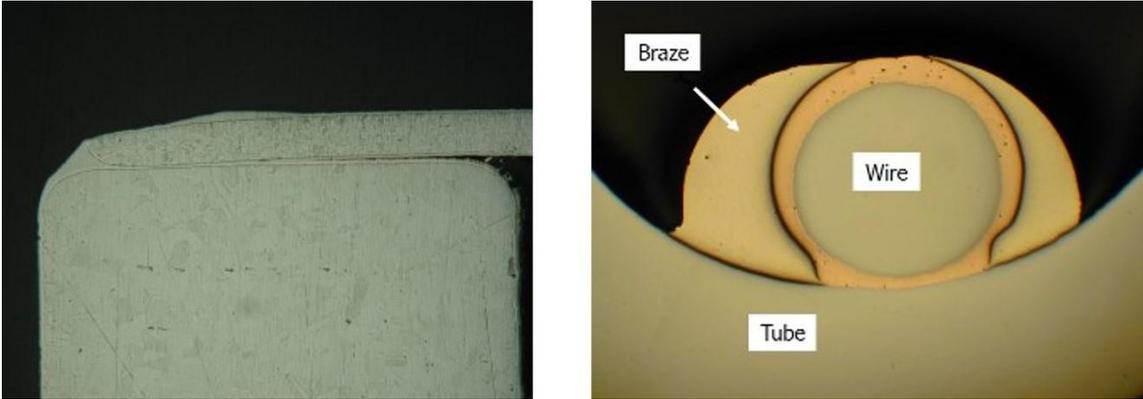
Section of braze joint on the left show a braze between kovar lid and base. Flow of Ni and Au plating to form a fillet is evident. Section on the right shows a braze joint that is actually a solid-state bond on the inside, even though a braze fillet is visible on the outside.
